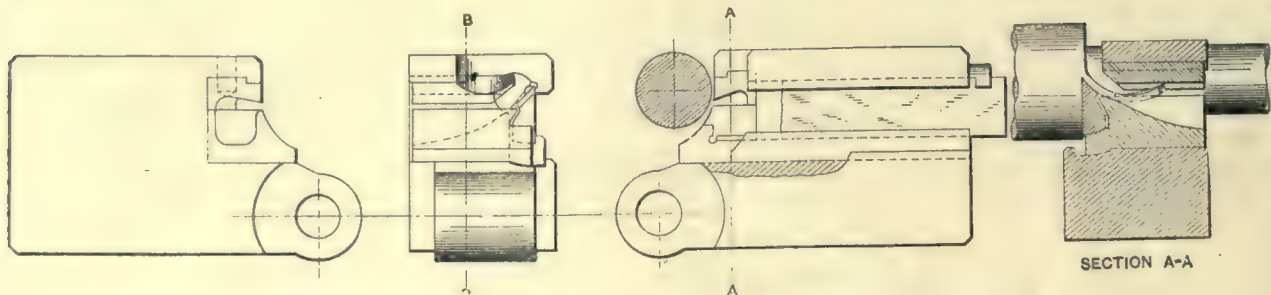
Details of Turning Tool Showing Chip Breaker for a Curling Chip.
